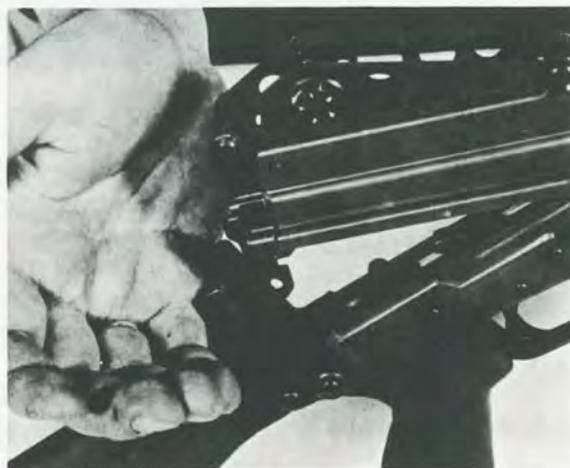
Removing the carrier, piston and bolt assembly.
